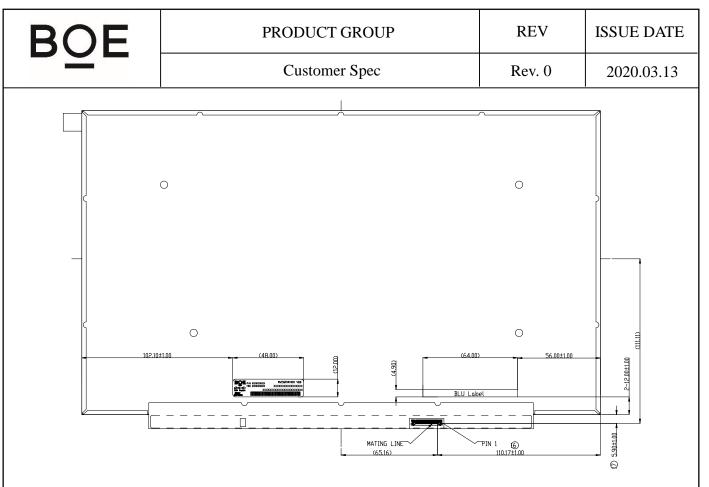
TFT-LCD Module Outline Dimensions (Rear view)
